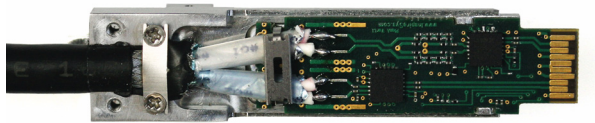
SFP+ Active Copper Cable Assembly using CDRs
